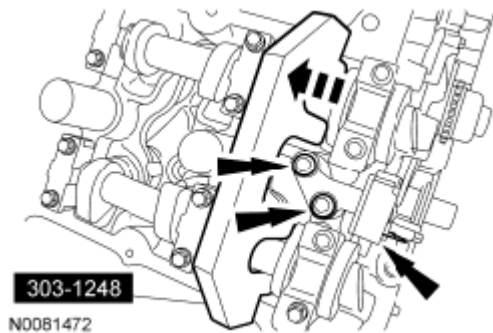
Locating RH Secondary Timing Chain Tensioner & Bolts
